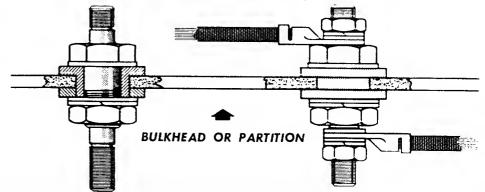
BULKHEAD THRU-LEAD: Circuits on either side can be removed without disturbing opposite connections.
